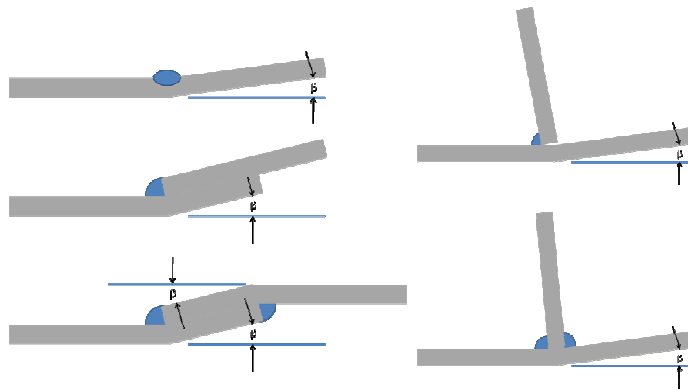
A textbook illustration of distortion modes due to welding analogous to the T-joint case
